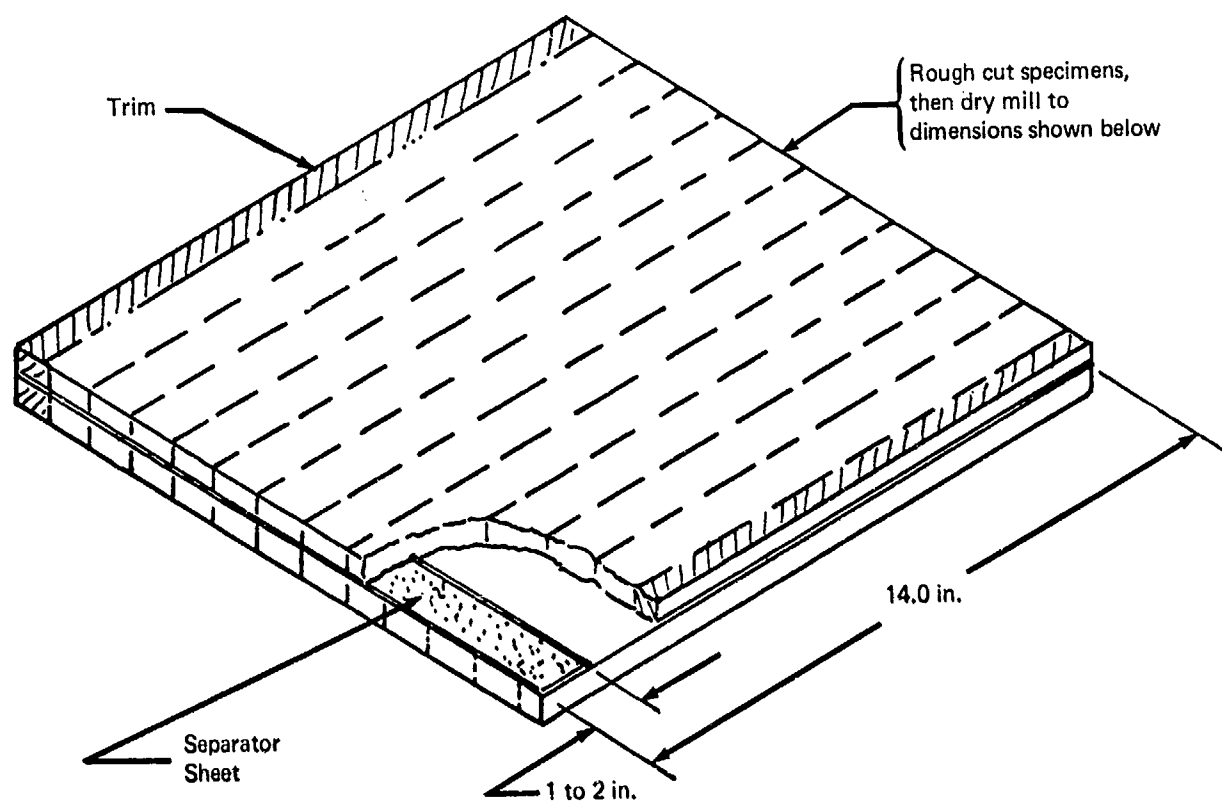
Thick-Adherend Machined Lap-Shear Specimen
